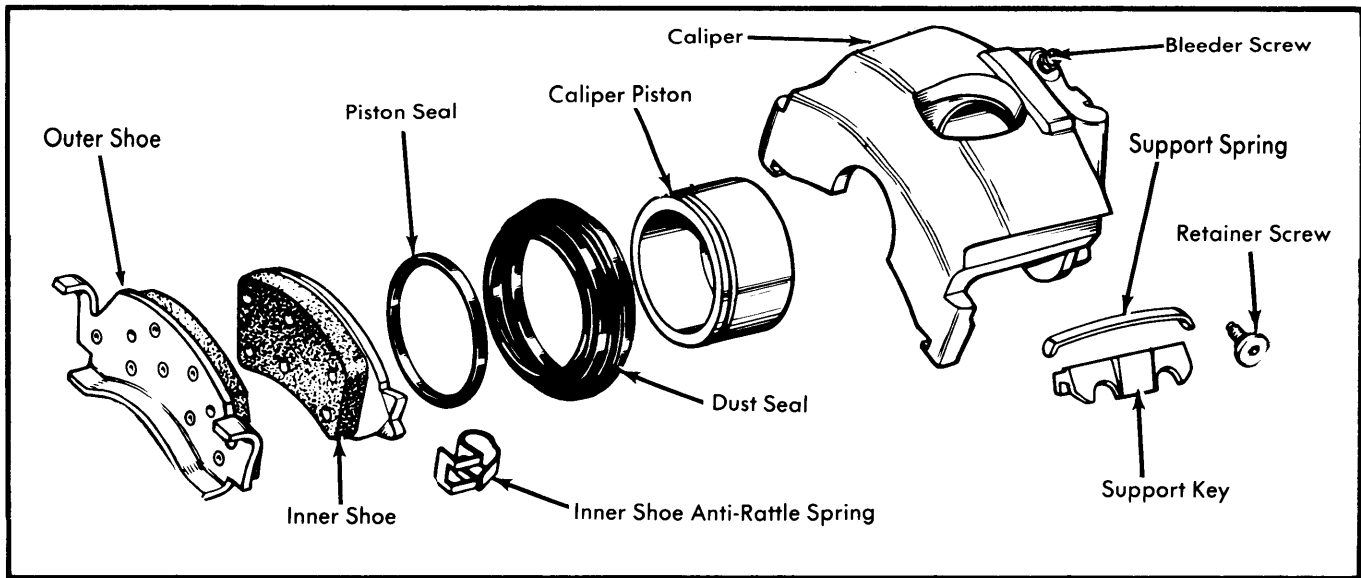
Exploded View of Front Sliding Caliper Assembly (American Motors Shown)
